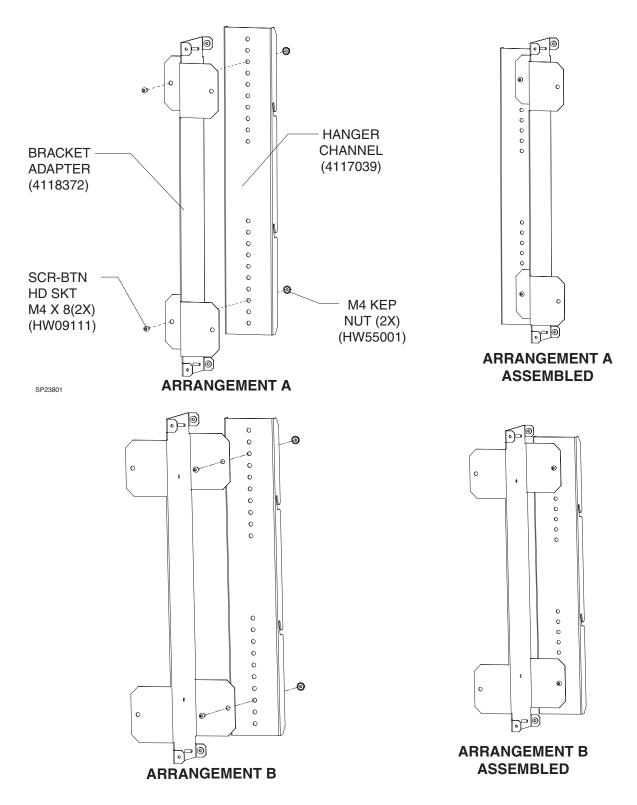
Bracket Assembly Configurations on Fabius GS
